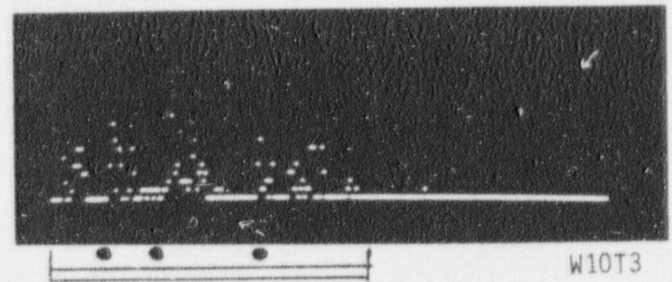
DETECTION OF 1.5" SLAG INCLUSIONS DURING SUBMERGED ARC WELDING OF A533B STEEL
